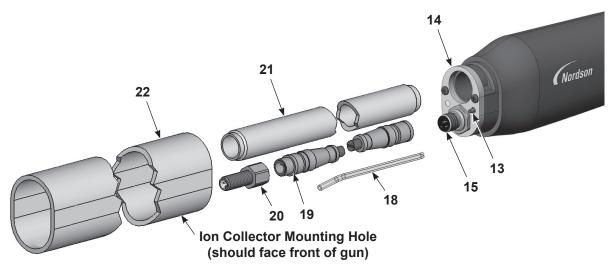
Tube-Mount Gun Disassembly 2 of 5
